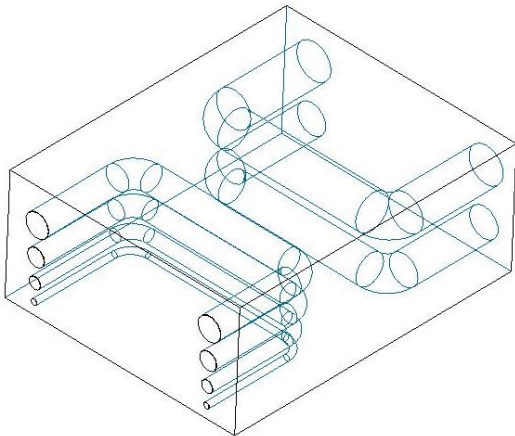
Test sample CAD in isometric view for U-shaped channels
